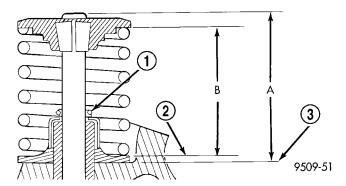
Valve Tip Height/Valve Spring Installed Height
